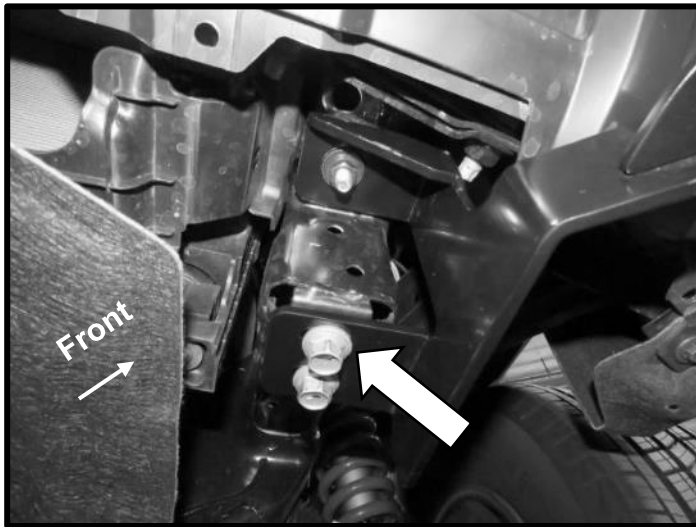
Install the Mounting Bracket to the Bolt Plate as pictured.
